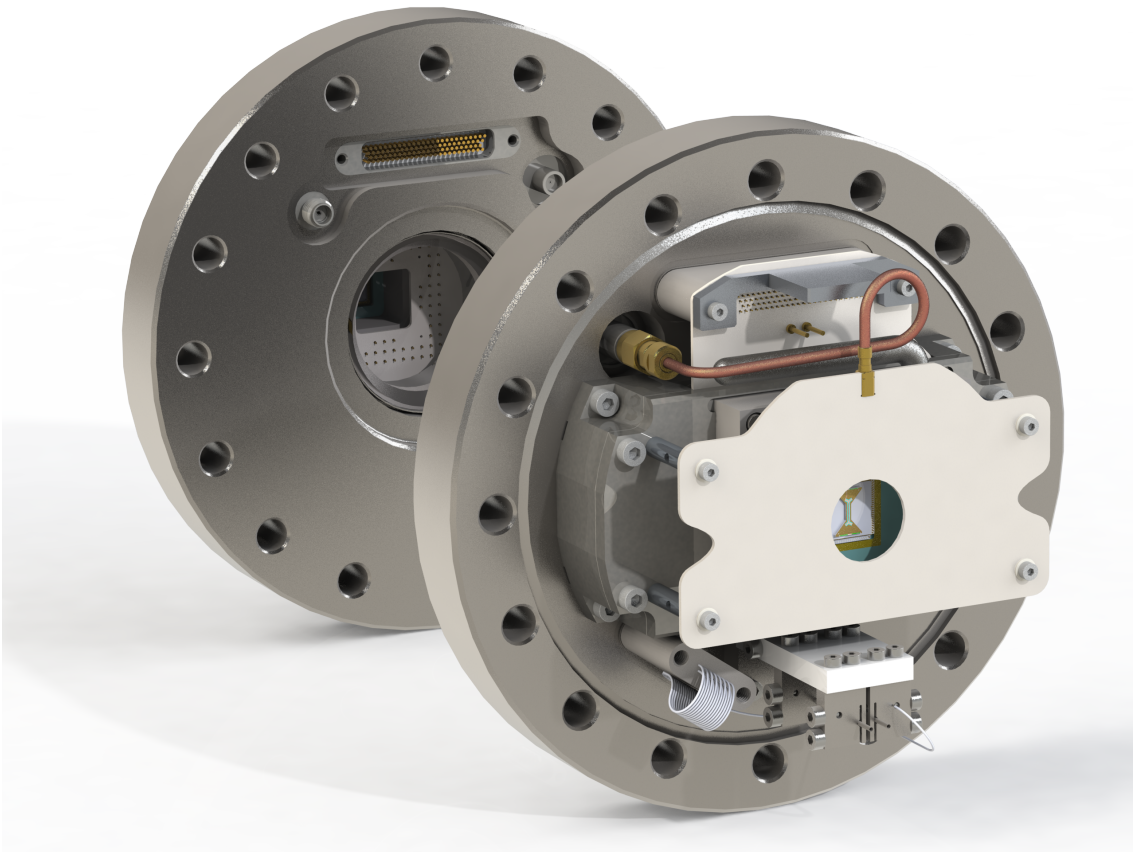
Render of the vacuum flange assembly, incorporating all necessary feedthroughs, and mechanically mounting all internal components of the vacuum system. The rear view illustrates the window for imaging the ion through the trap slot.
